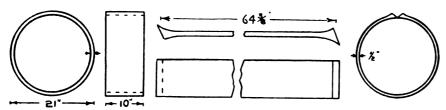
FORGING A WIDE RING FROM THIN STOCK.
